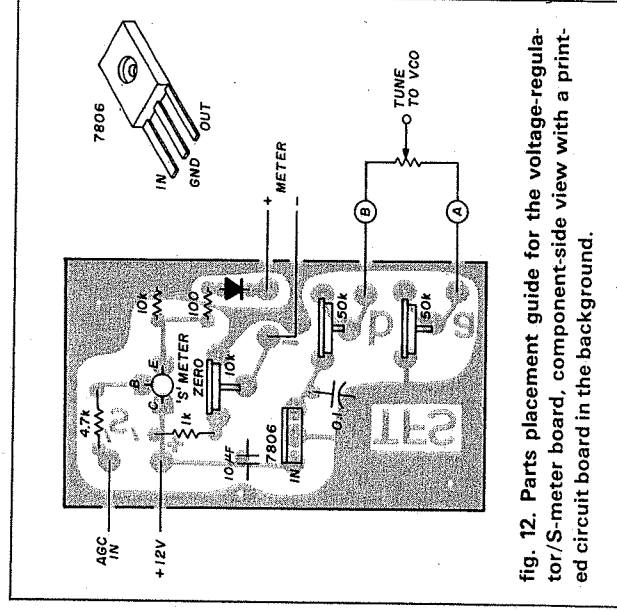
Parts placement guide for the voltage-regulator/S-meter board, component-side view with a printed circuit board in the background.
